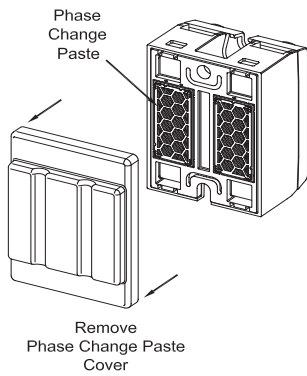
Remove cover before mounting on the panel chassis or heatsink.
